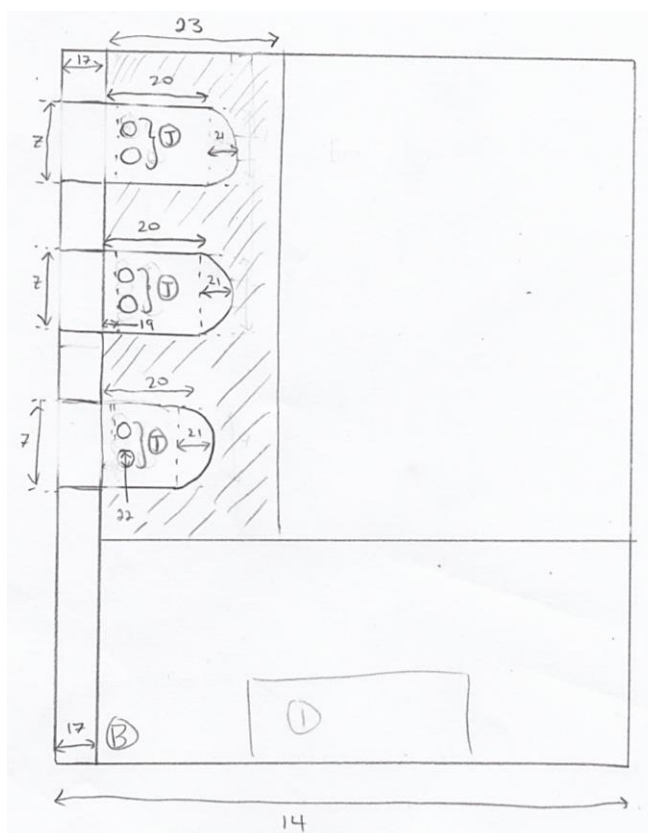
Cutaway side view 2 of the CleanLift panel, showing button recesses
